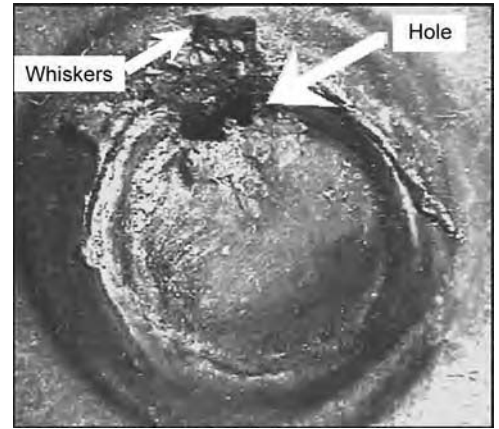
Burning hole on the surface of a steel weld. Source: Ref 1
